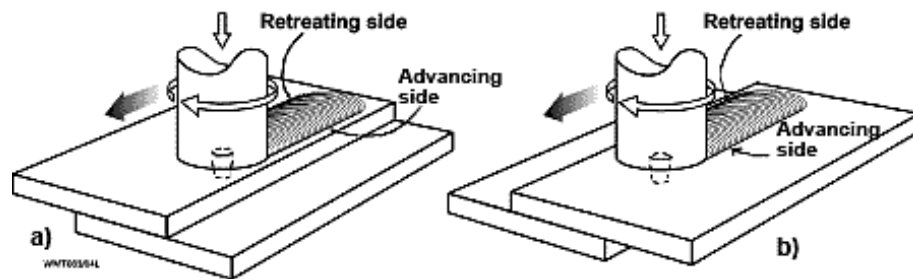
Lap weld joint configuration: a) Advancing side near the top sheet edge (ANE), b) Retreating side near the top sheet edge (RNE) (Thomas et al., 2004).
